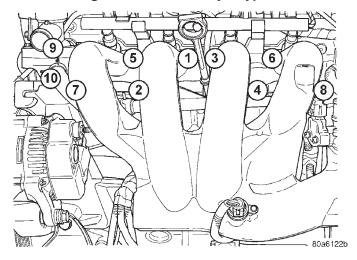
Intake Manifold Tightening Sequence—2.4L Engine
